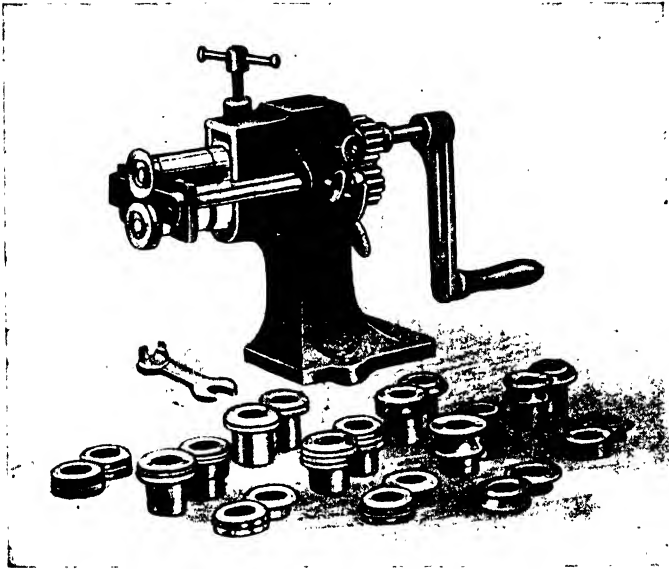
UNIVERSAL SWAGING, WIRING, JENNYING AND CLOSING MACHINE
